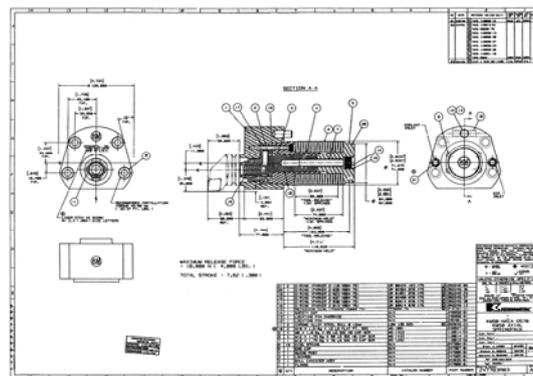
Multi-view assembly drawing of a spring pack (Bertoline 2002)
